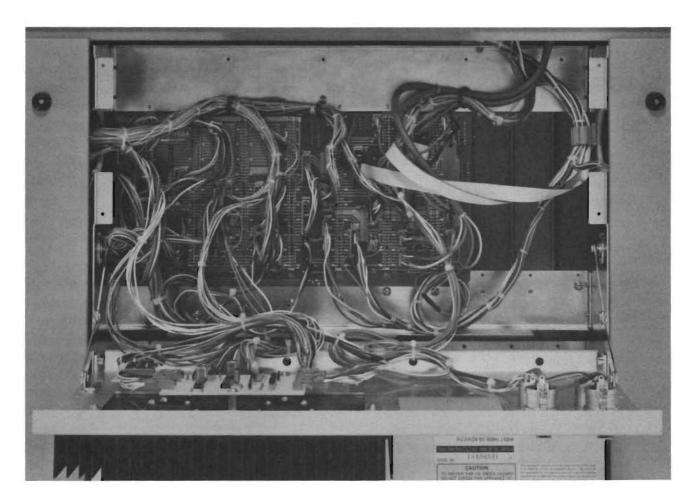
CHECK THE VARIOUS CONNECTORS AND COMPONENTS ON THE UPPER CARD CAGE MOTHER BOARD, AND THE INTERFACE PANEL BEHIND IT.
